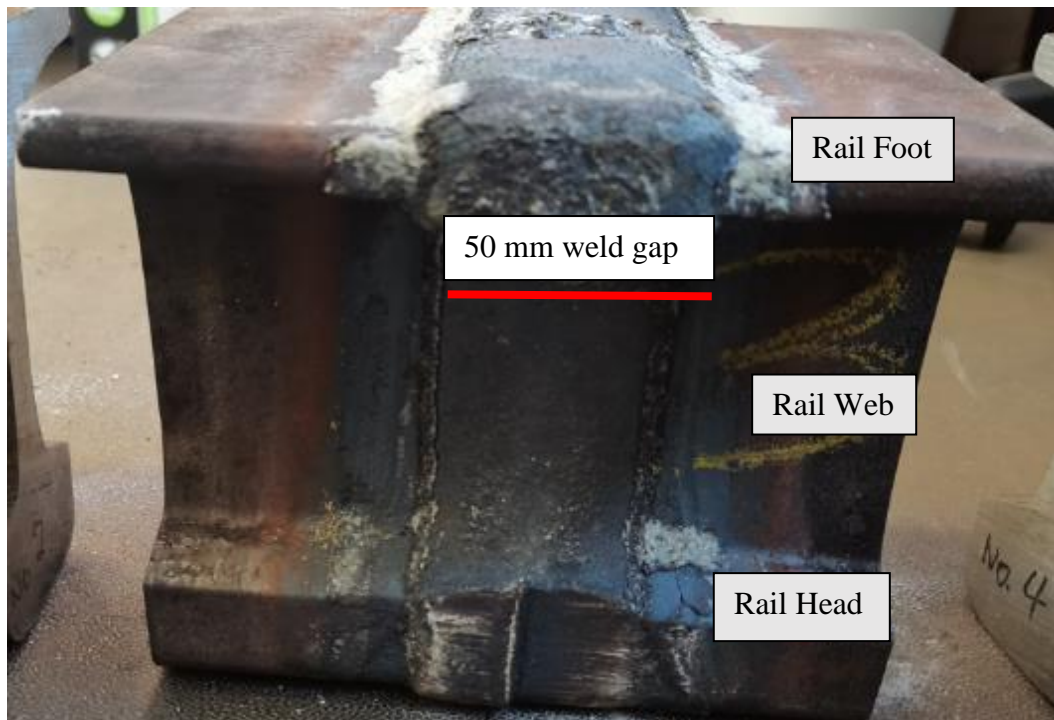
Thermite welded rail with a 50mm weld gap.
